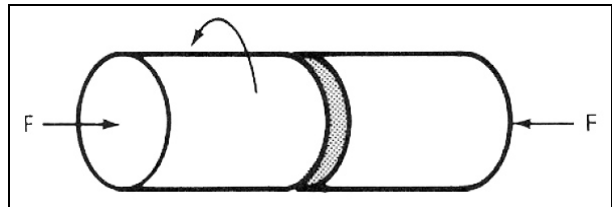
Basic Rotational Friction Welding [26].
